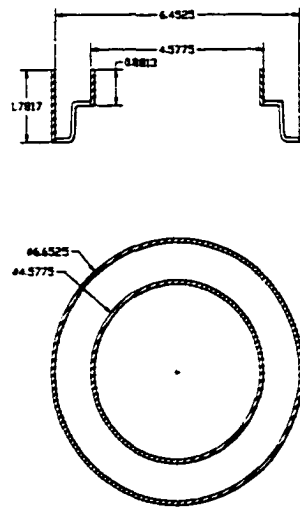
Dimensions and general parts involved in manufacturing the Bell
